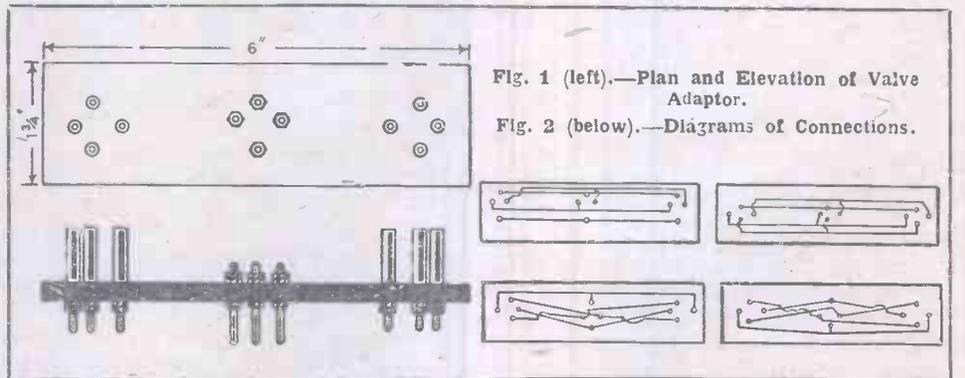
(left).—Plan and Elevation of Valve Adaptor.
